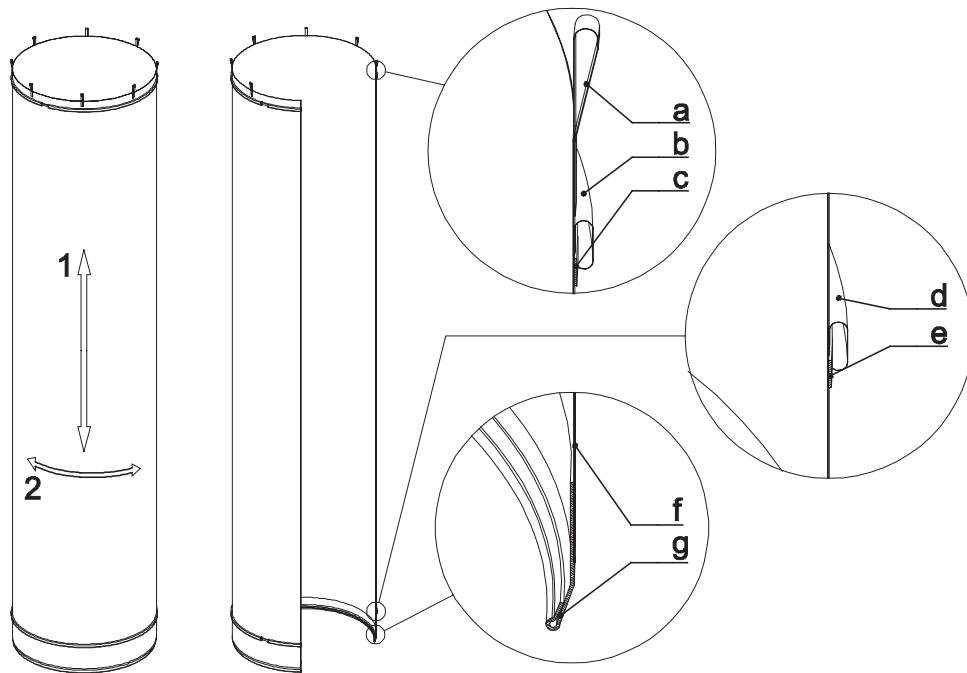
Tube. 1) Warp threads direction. 2) Weft threads direction. a) Lift loop. b) Upper expansion ring. c) Pocket for expansion ring by folded sheet. d) Pocket for expansion ring by glued on sheet. e) Lower expansion ring. f) Seal. g) Bottom fold of seal that will fit in bottom plate groove and be expanded with an o-ring.
